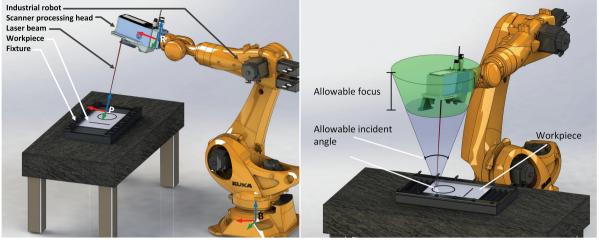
A KUKA Quantec KR 120 R2500 pro mounted with an Arges remote welding elephant head. Notice the position of the three frames, the base frame B, the robot frame R and the processing frame P.
